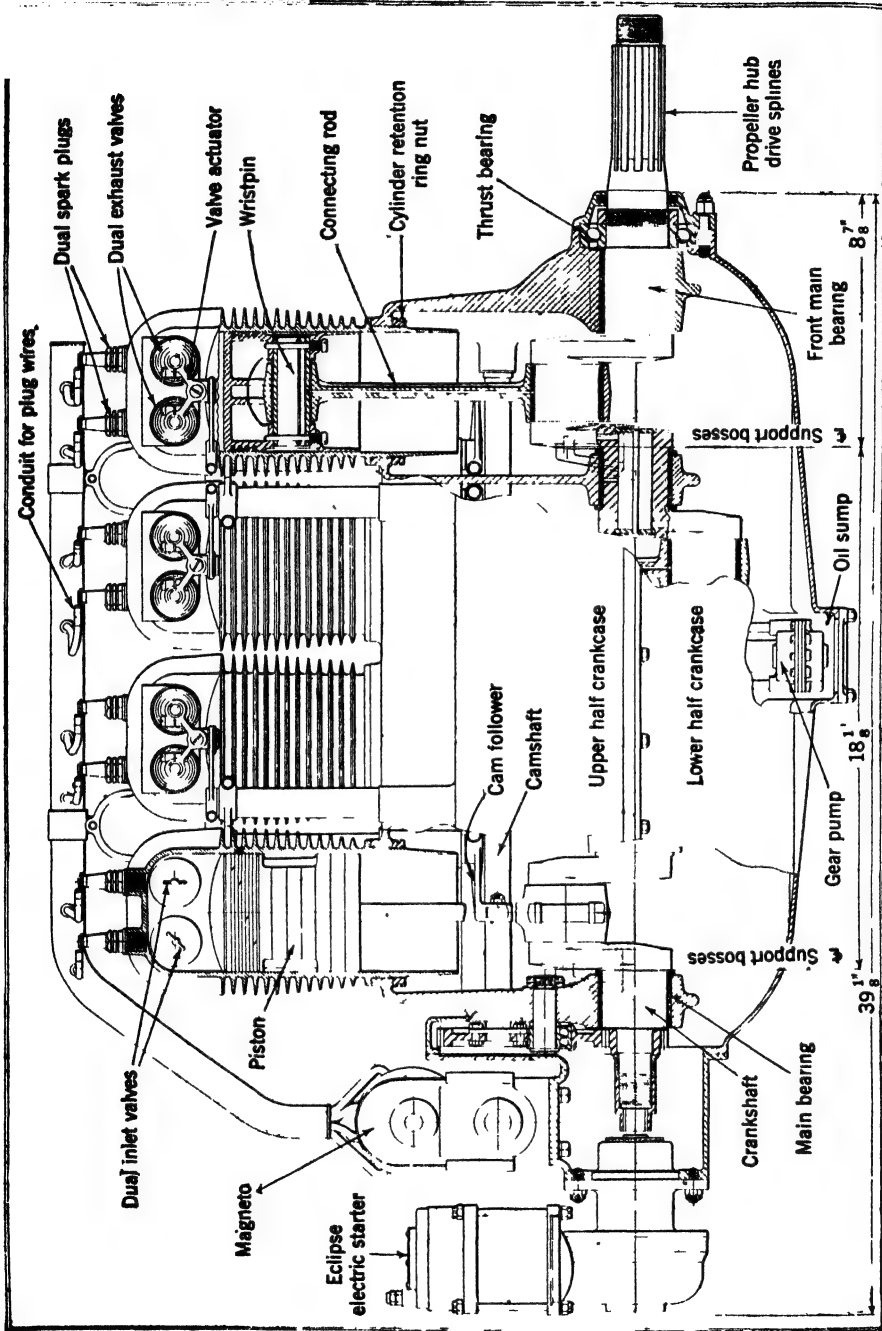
A.—Longitudinal Sectional View of Cameron 60 Horsepower Four-Cylinder Aviation Engine, Showing Dual Inlet and Exhaust Valves and Method of Actuation by Vertical Rocker Shafts.
